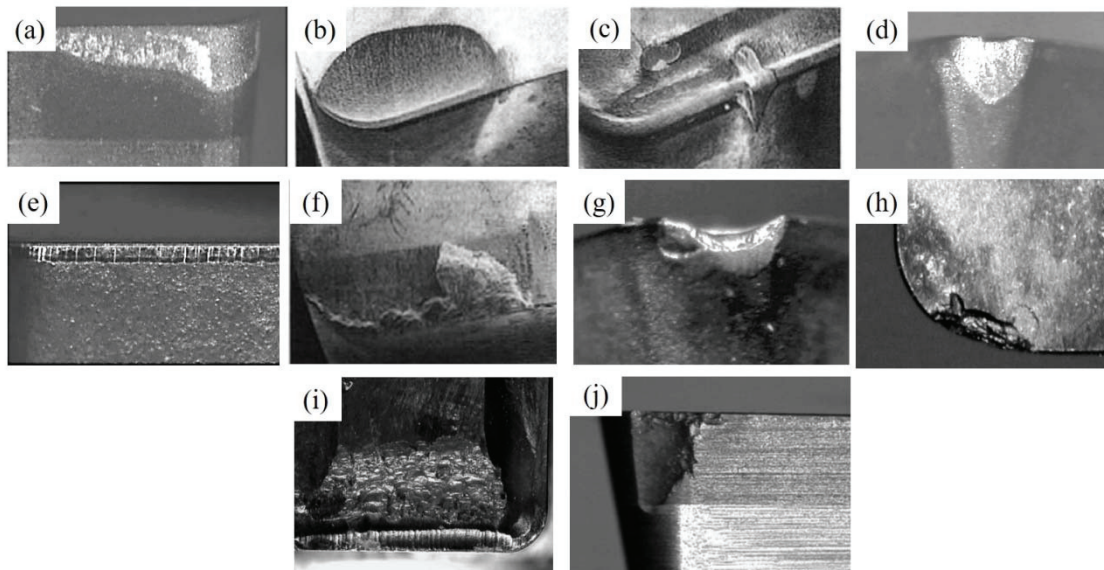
(a) Severe flank and nose radius wear on a carbide insert used to machine 390 Al. (b) Rake face wear on a cemented carbide tool produced during the machining of plain carbon steel. (c) Notch wear on a carbide tool produced during the machining of a nickel-base super alloy. (d) Nose radius wear on a coated carbide insert used to machine a nickel alloy. (e) Thermal cracks in coated carbide inserts used to mill compacted graphite iron under dry machining. (f) Built-up edge produced during low speed machining of a nickel-base alloy. (g) Plastic deformation of a carbide tool edge used to machine a nickel alloy. (h) Edge chipping on a polycrystalline cubic boron nitride insert used to machine hard steel. (i) Built-up edge produced during low speed machining of a nickel-base alloy. (j) Fractured edge on a polycrystalline cubic boron nitride insert used to machine hard steel^{4,5}).
